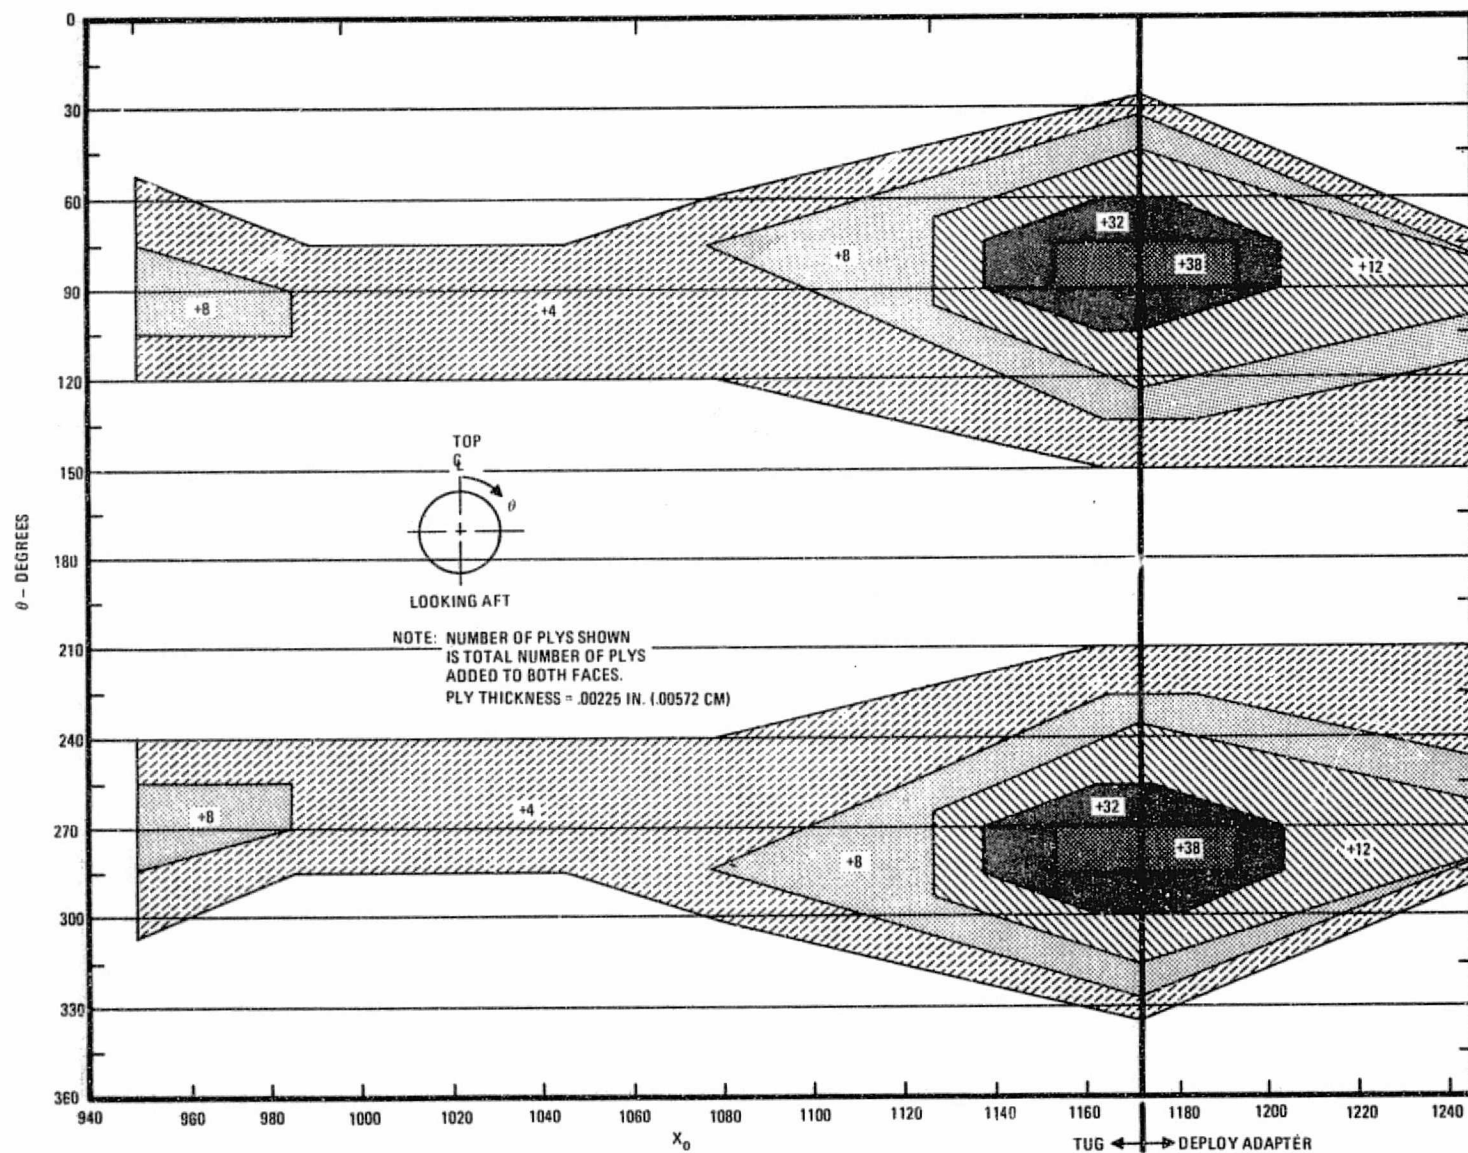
Tug Body Sidewall Reinforcement, Configuration 2-1
